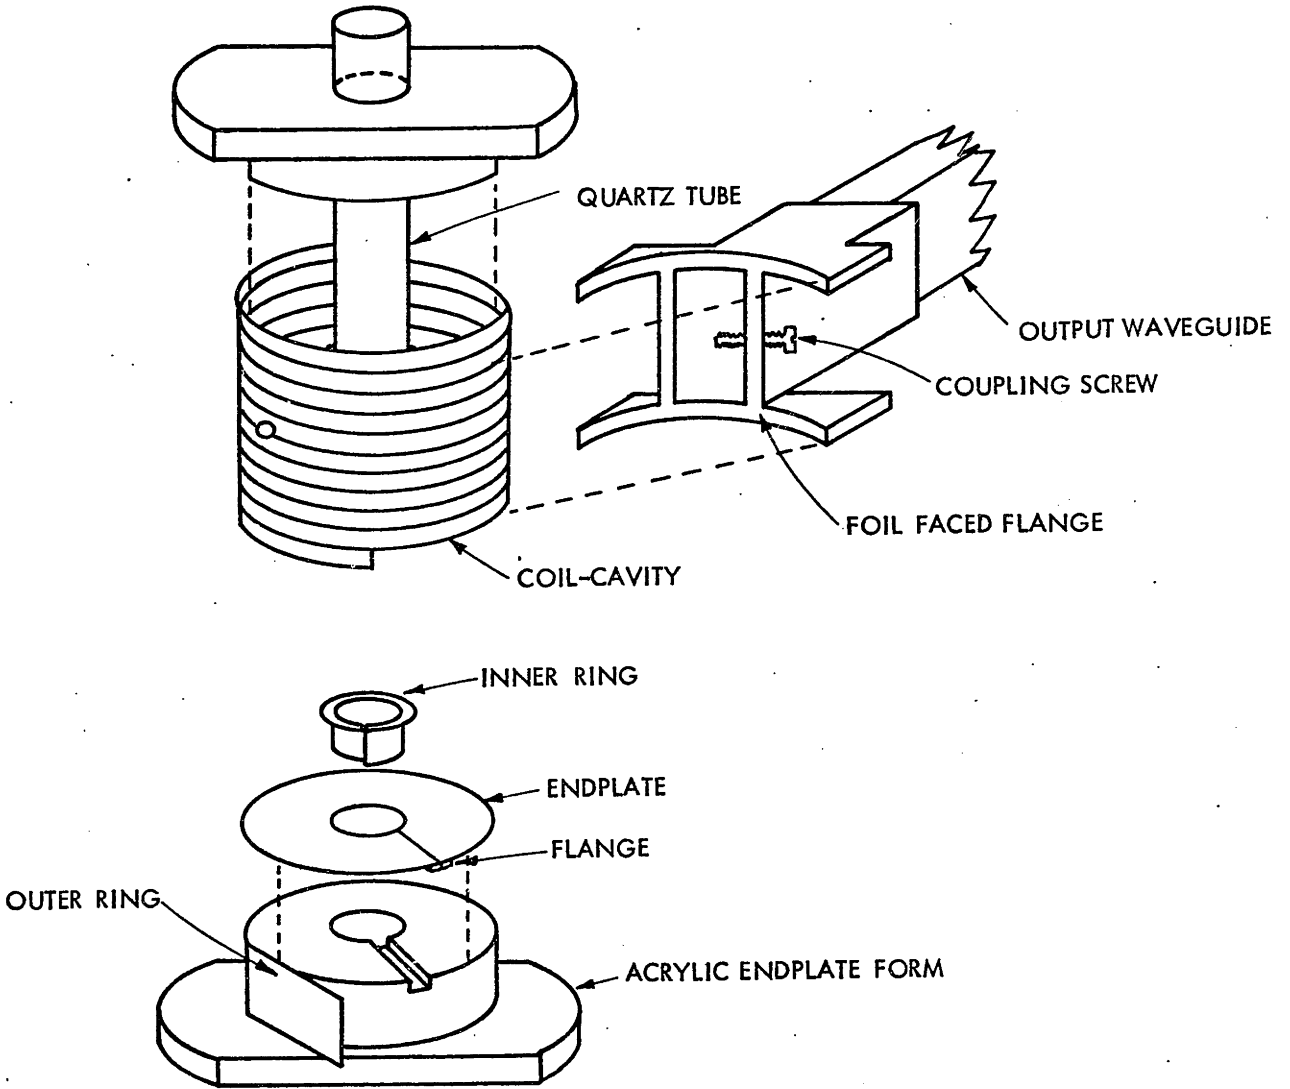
EXPLODED VIEW OF CAVITY ASSEMBLY
